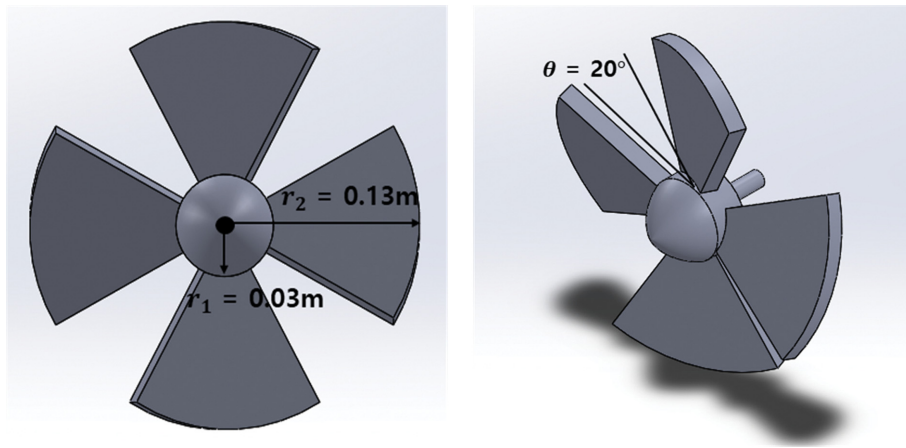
Front view (left) and side view (right) of the rotor blade.
